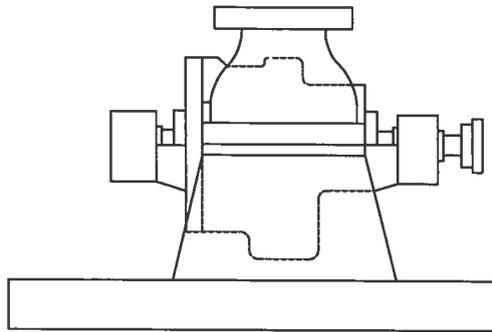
Pump type BB2: Horizontal, radial split, single and two stage, between-bearings design
